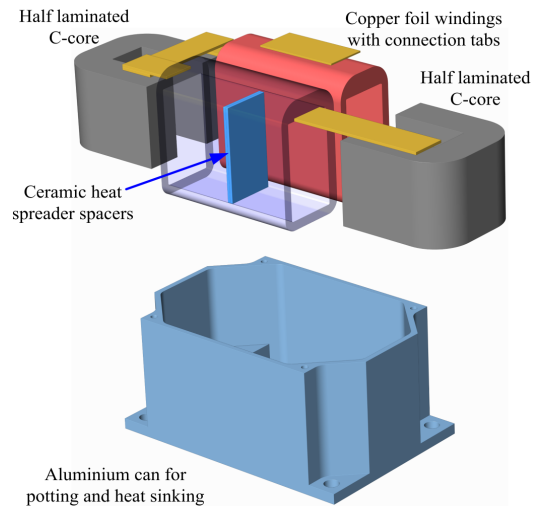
Exploded drawing of the inductor assembly with the ceramic heat spreaders.
